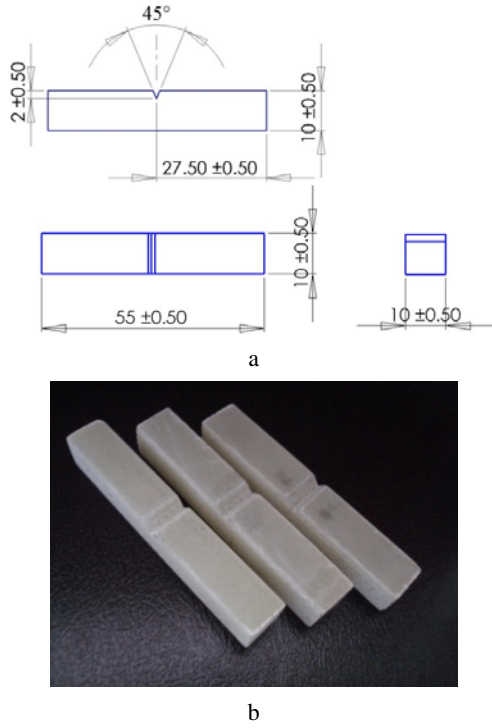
Standard dimension (a) and typical fabricated specimens (b) for Charpy impact test
